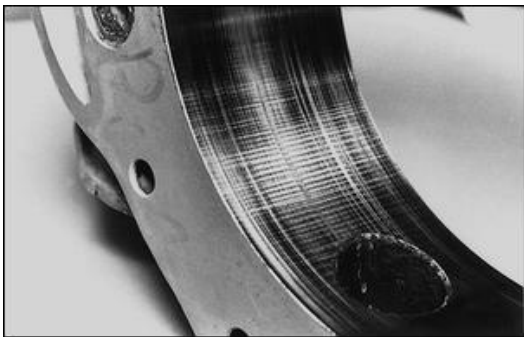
Chatter mark on a rotor housing inner surface of an wankel rotary engine.
